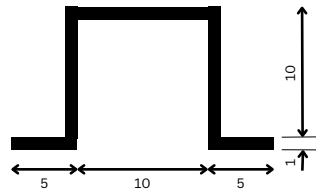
Dimensions of selected hat stringer, in millimeters.
